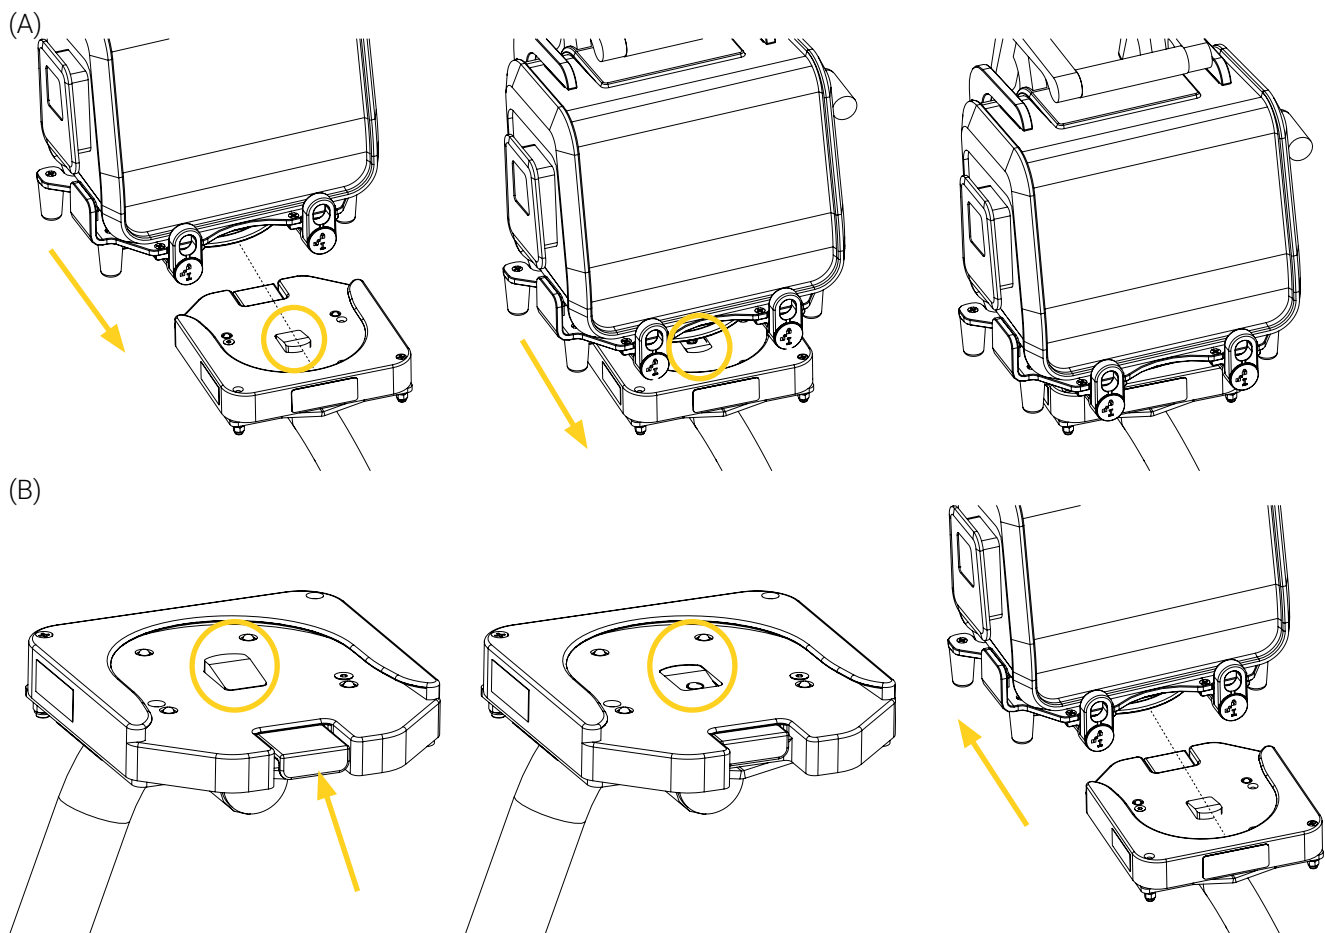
Locking/unlocking the mounting bracket on the SAS 500
